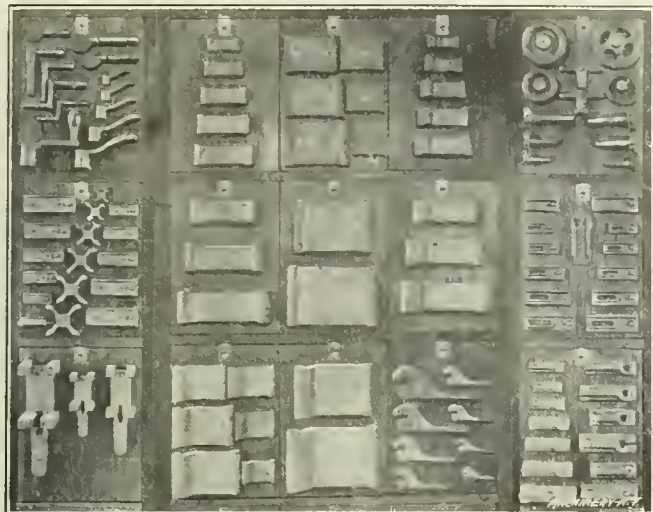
Cabinet of Standard Parts for Reference of Draftsmen
